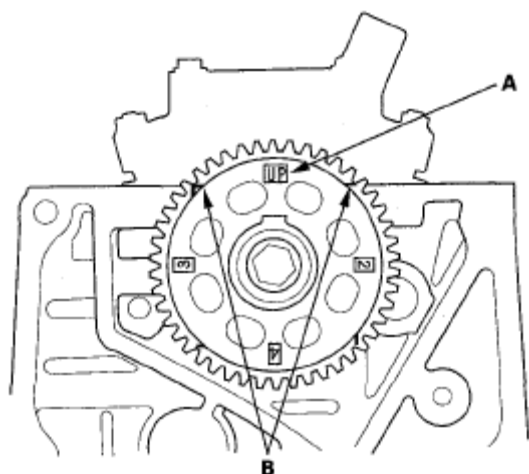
Identifying Camshaft TDC Up Mark On Camshaft Sprocket
